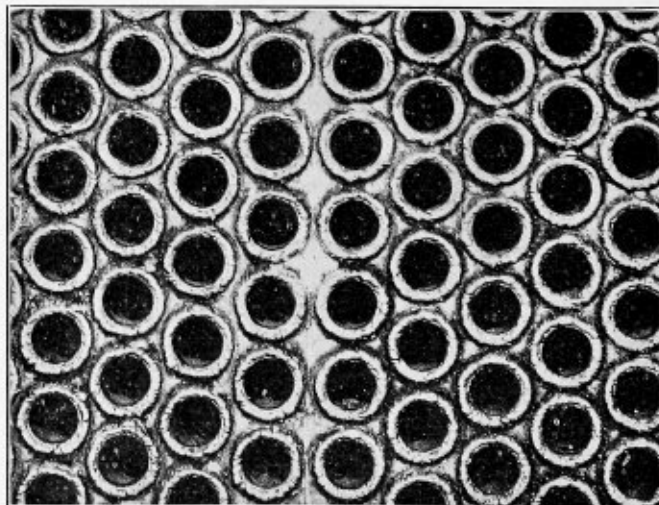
Showing a Flue Sheet in Which All of the Flues Have Been Electrically Welded
